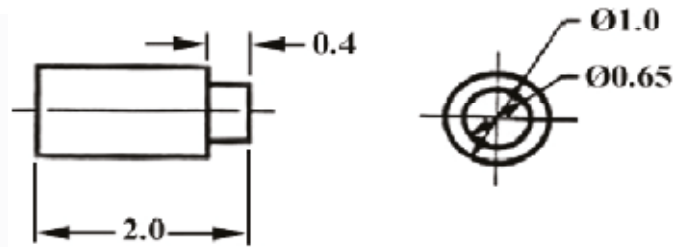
Dimensioning (in inch unit) a cylindrical solid object having two different diameters
